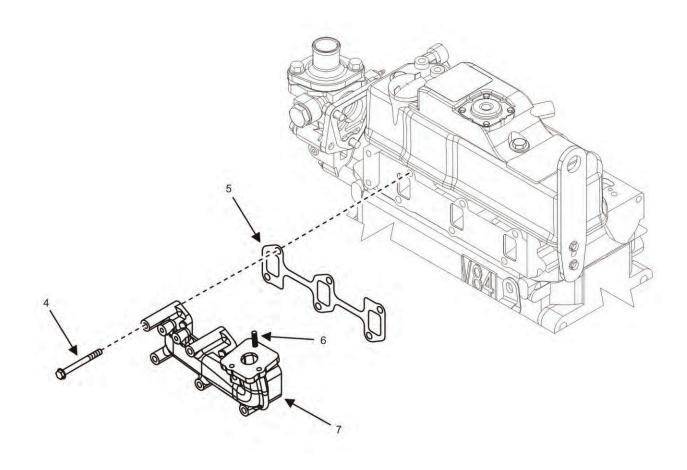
Exhaust Manifold (Sheet 2 of 2).
